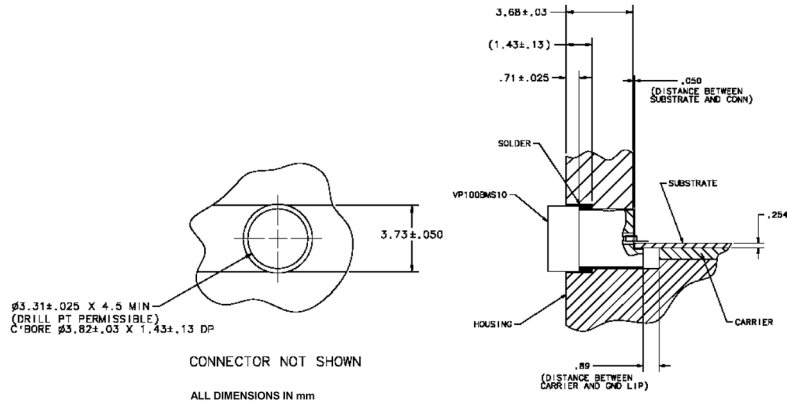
VP100BMS10 Mounting Hole Dimensions and Assembly for a Thick Wall Housing
